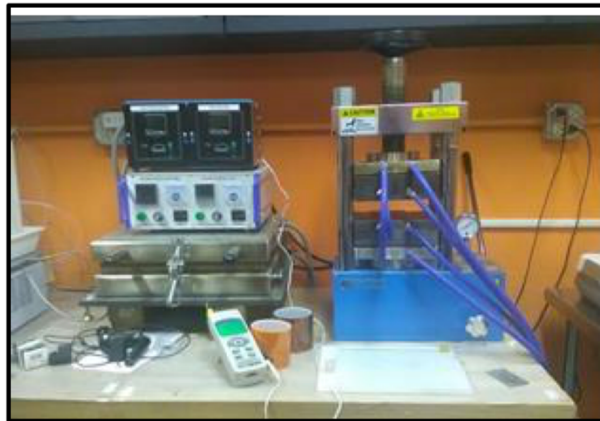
4. First and second hot press machine used for the composites' manufacturing. [49]
